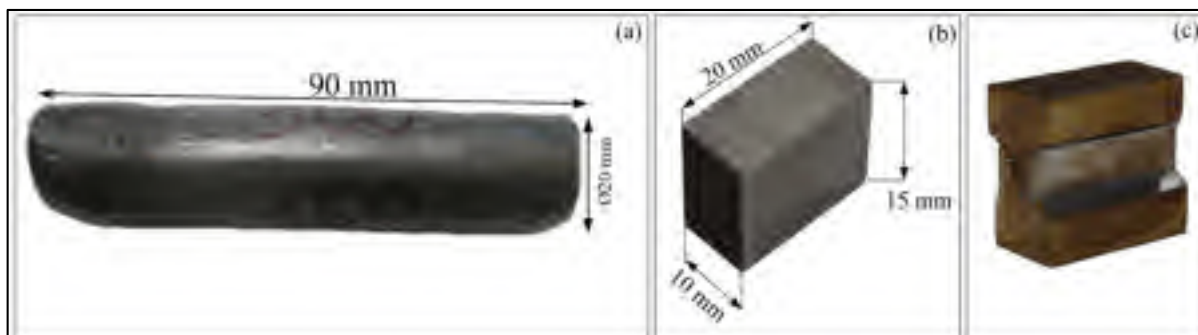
Plane-strain compression testing specimen at various preparation stages: a) ECAP-processed billet; (b) specimen before testing and (c) specimen after testing
